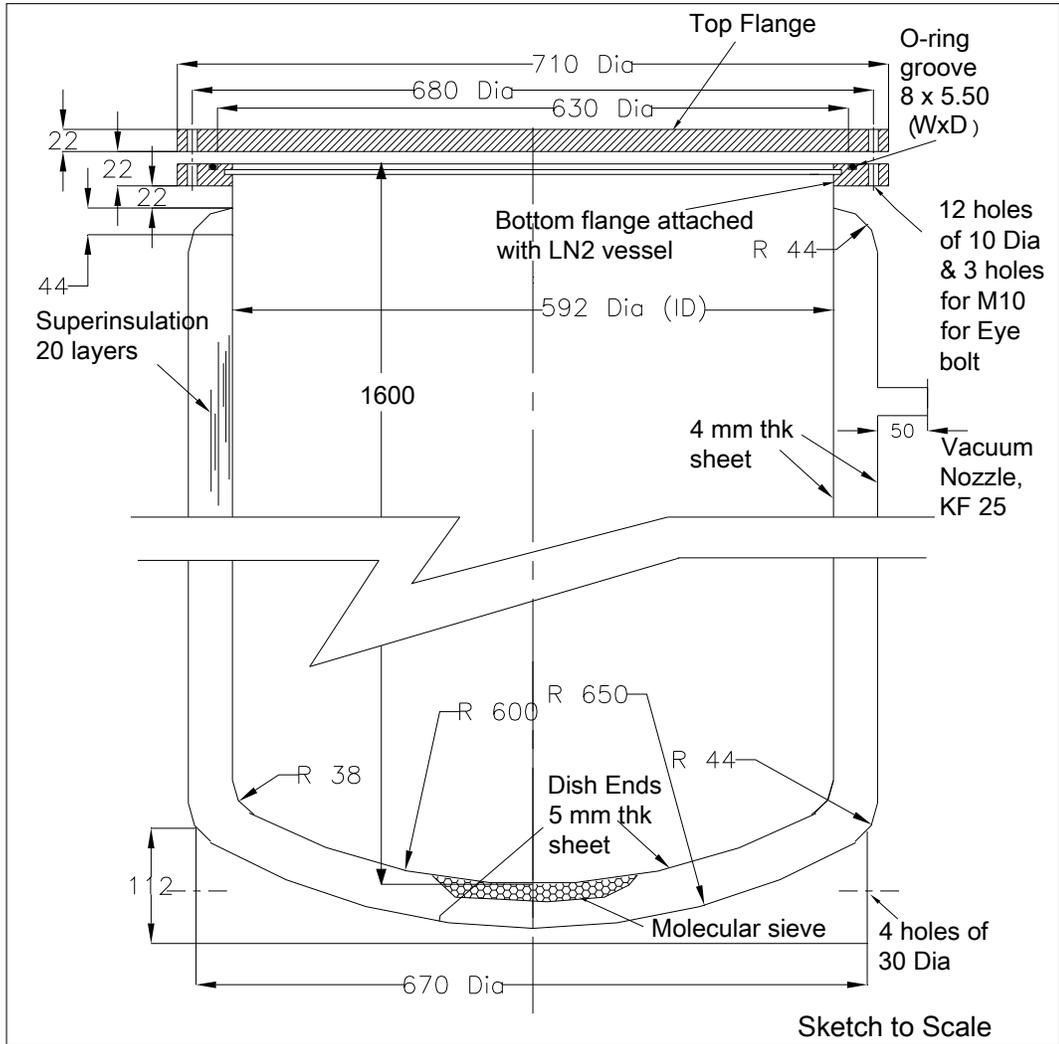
Superinsulated LN₂ vessel of helium purifier
